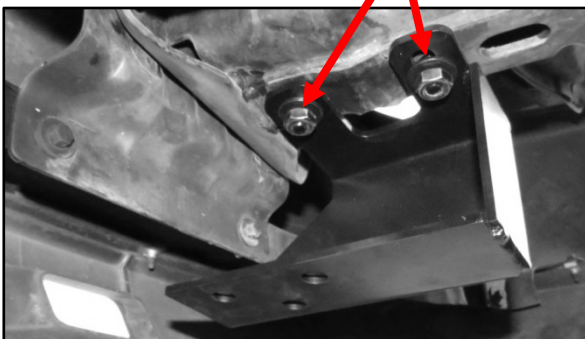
The double bolt plate could be installed by positioning it through the gap of the bumper and frame horn plate
